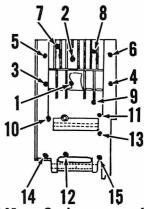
Crankcase screws for T10 should be tightened in sequence shown.
